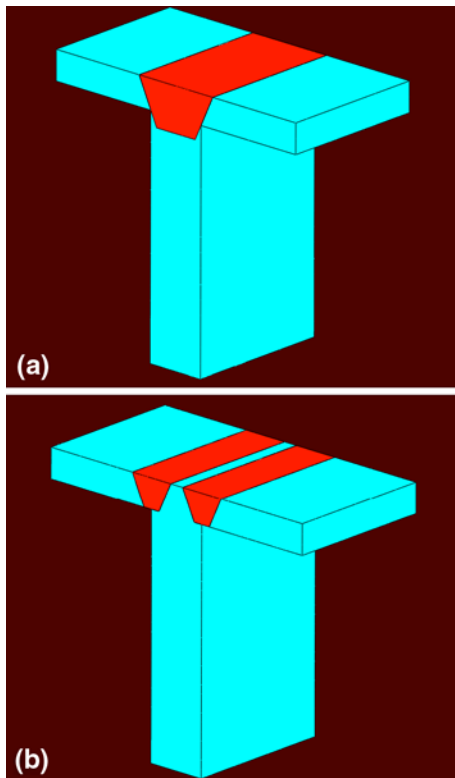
(a) Original weldment design containing a single T-joint which may require multi-pass FSW procedure; and (b) a potential modified design containing two 90° corner-butt joints
